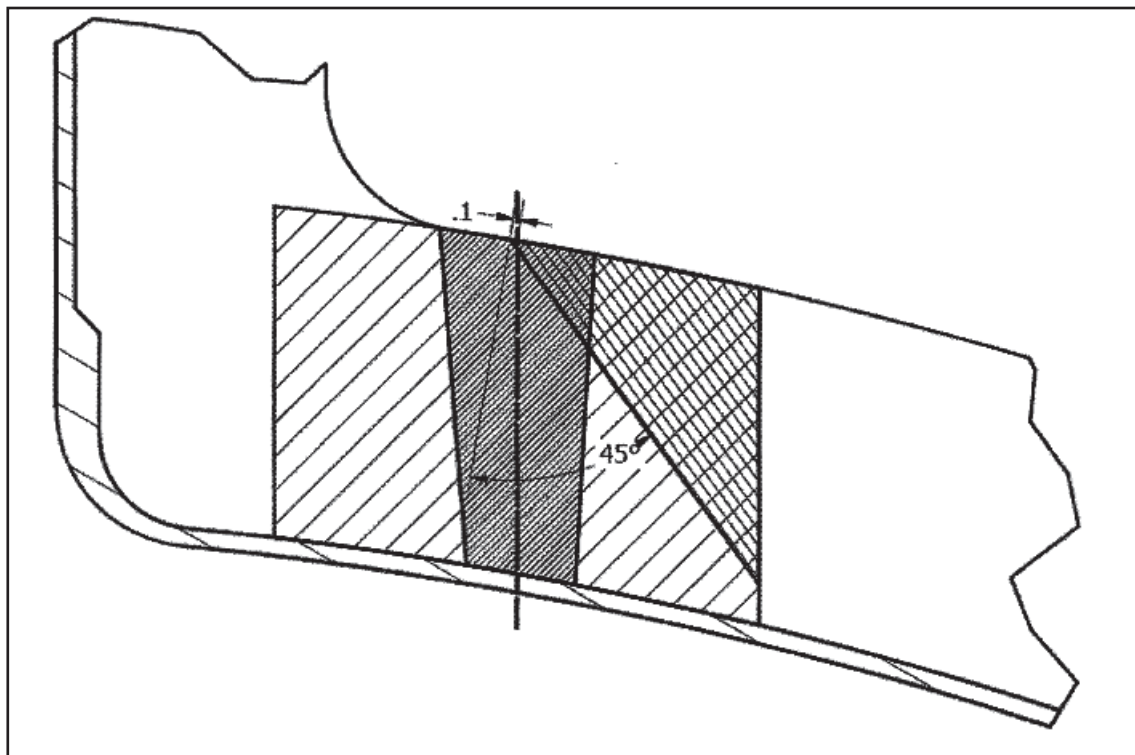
Weld WP-12, 45° Nozzle Side Axial Scans
